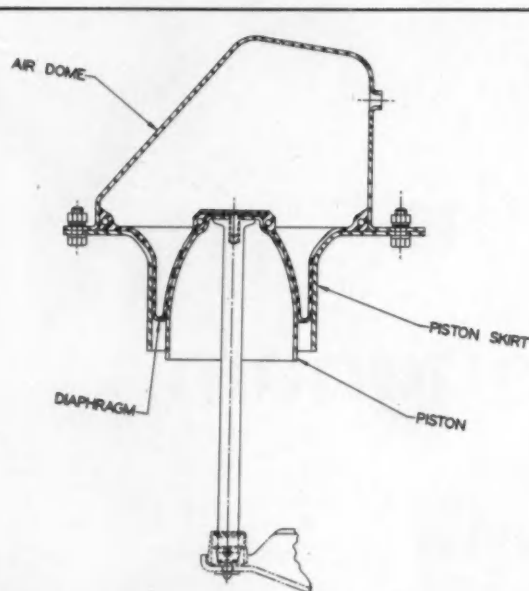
Rear spring design for the Brougham. Piston diameter is smaller than front spring and the top is closed and has a bullet-nosed shape.
